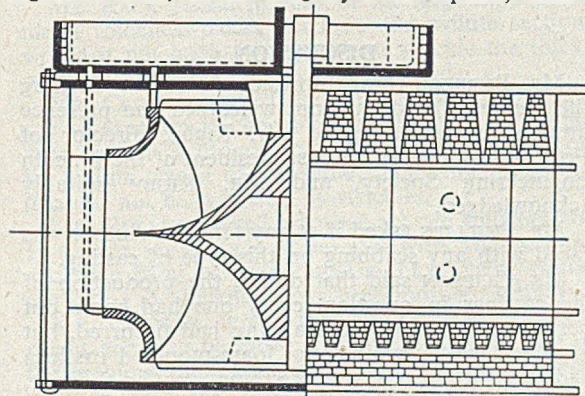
Half-section and Part Exterior of the Completed Impeller Mould Set-up.
